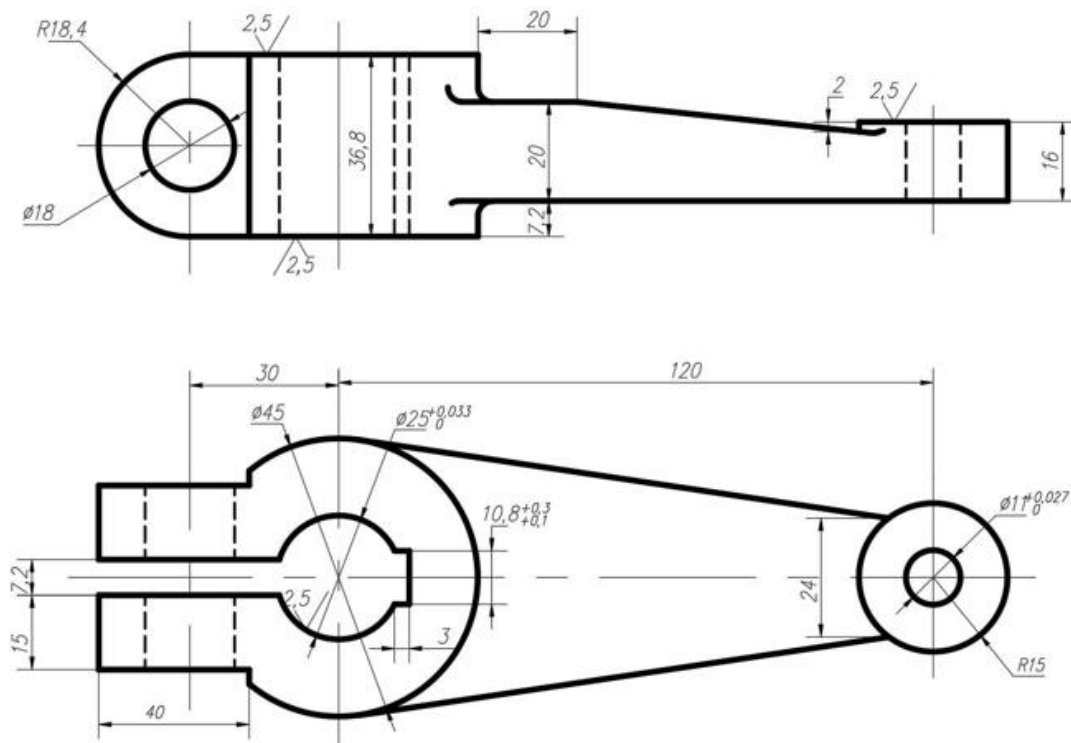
Technical drawing and principal dimensions of the linkage arm.
